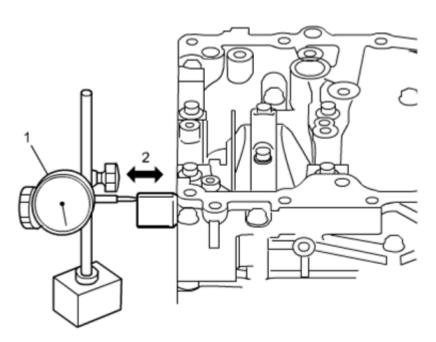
Measuring Crankshaft Thrust Play Courtesy of SUZUKI OF AMERICA CORP.
